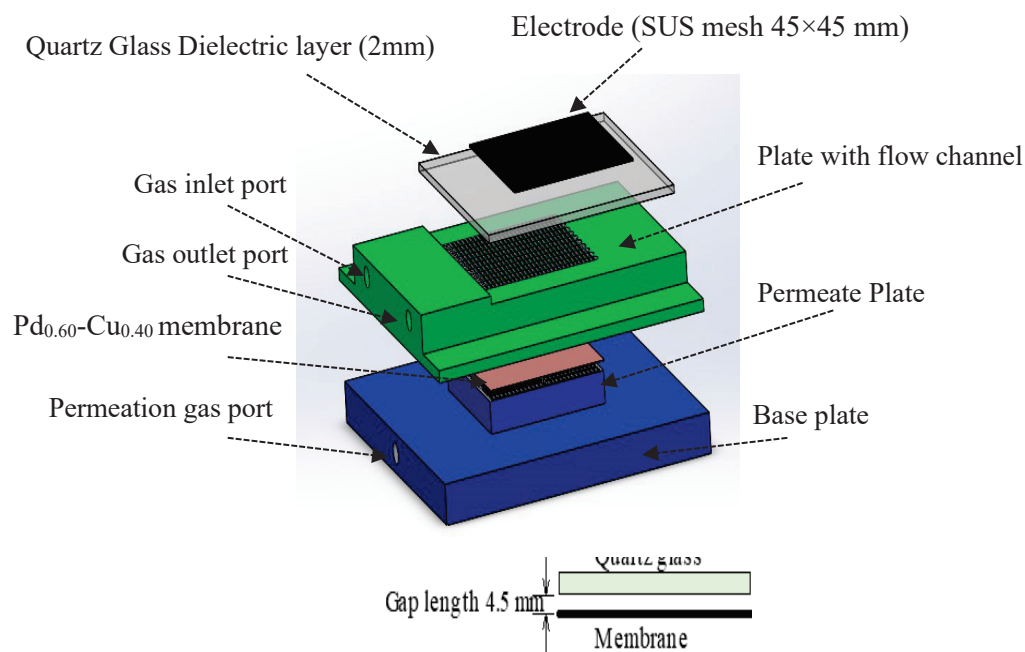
Exploded view of the micro-channel plate reactor (MPR) and gap length.
